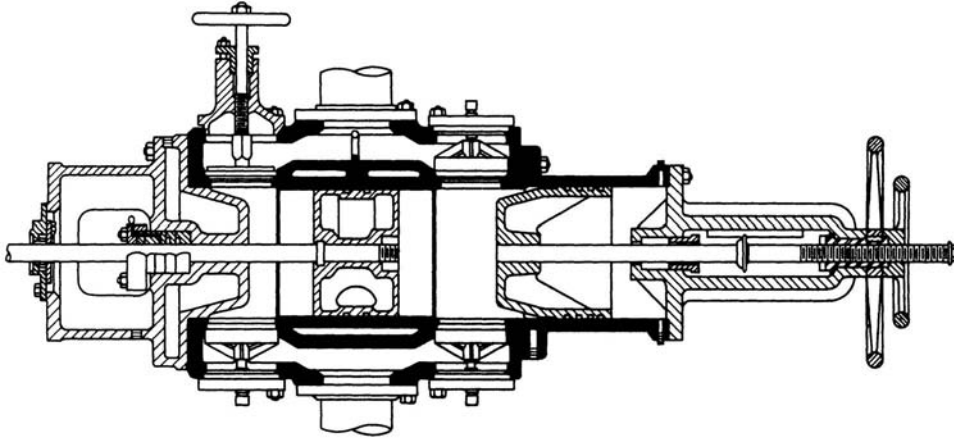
Sectional view of a cylinder equipped with a hand-operated valve lifter on one end and a variable-volume clearance pocket at other end.
